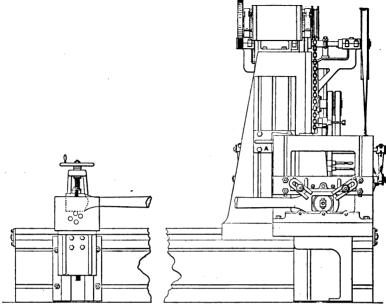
MACHINING A SOLID END CONNECTING ROD.
